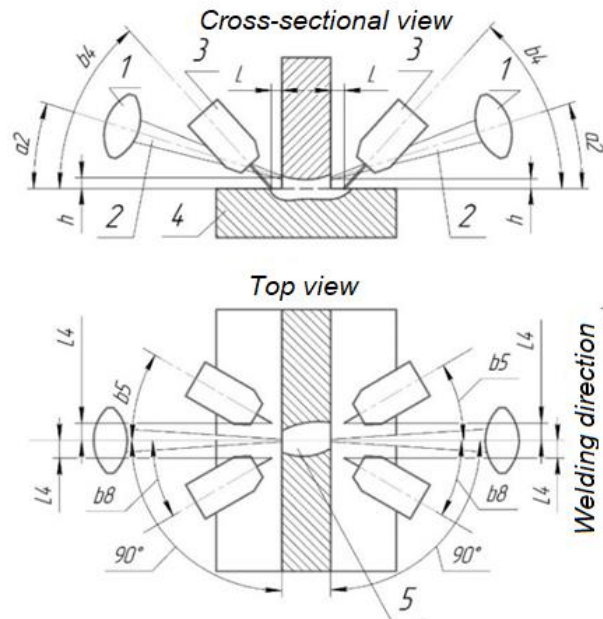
LAHW scheme, "hybrid tandem" method of butt welds in downhand position (PA):
